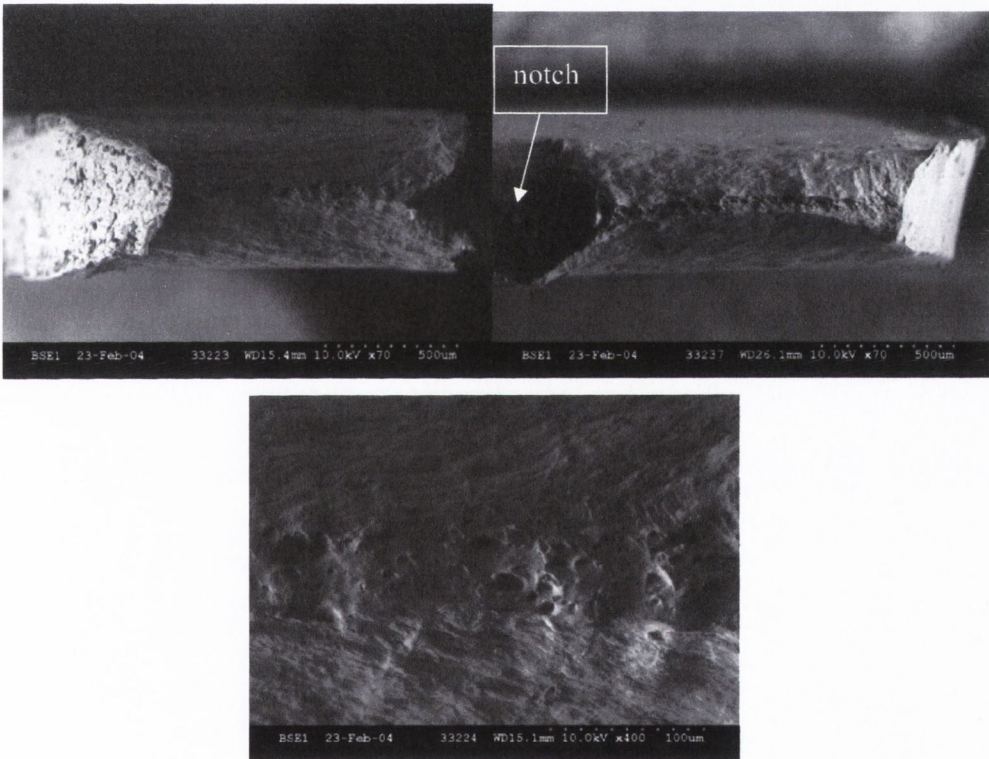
Tensile fracture surface of a plain aluminium plate
